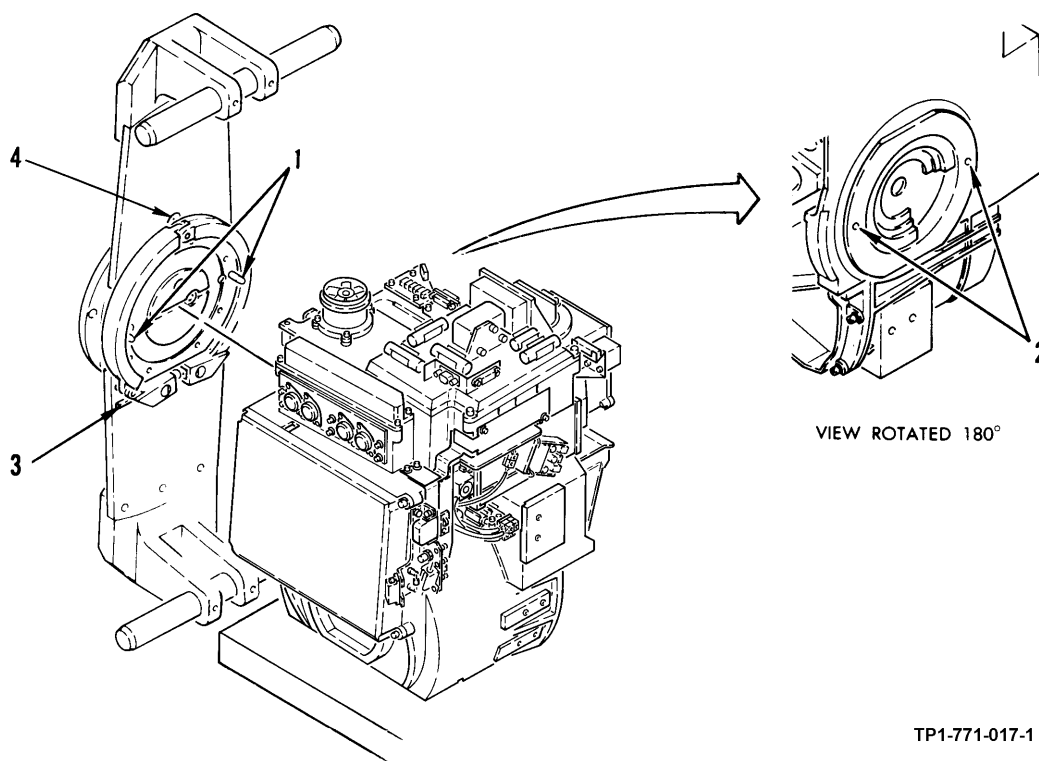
Mounting Insert/Adapter to TADS NSA
